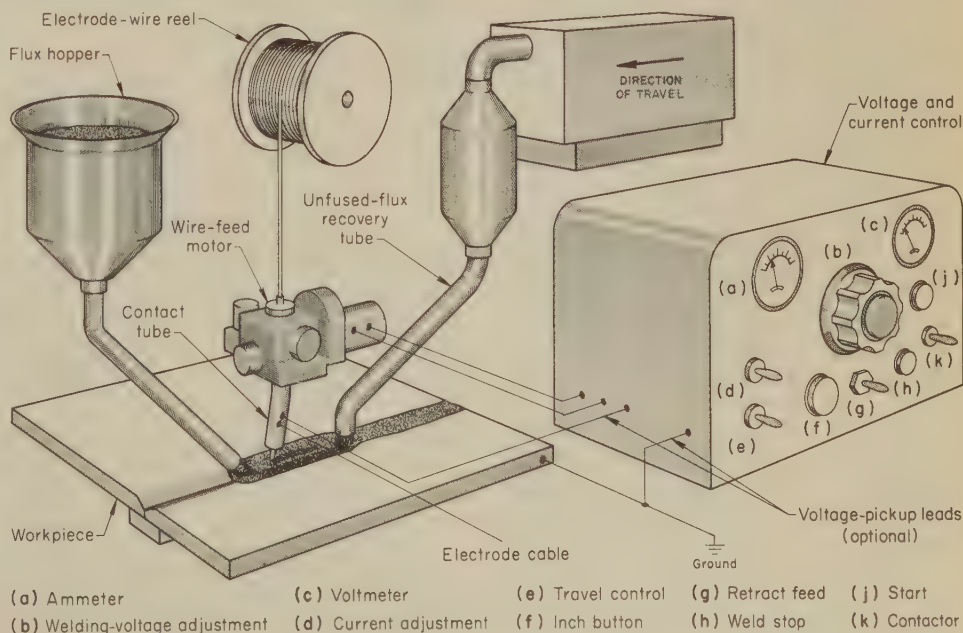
Essential components of a typical machine for automatic submerged-arc welding
